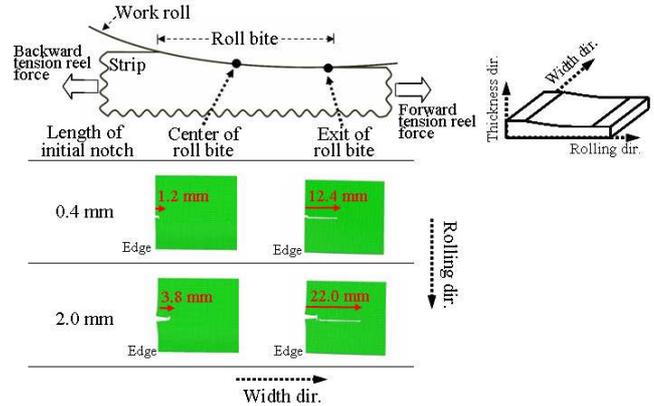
Edge fracture of electrical steel strip at roll bite during cold rolling when the forward tension reel force is 146kN
